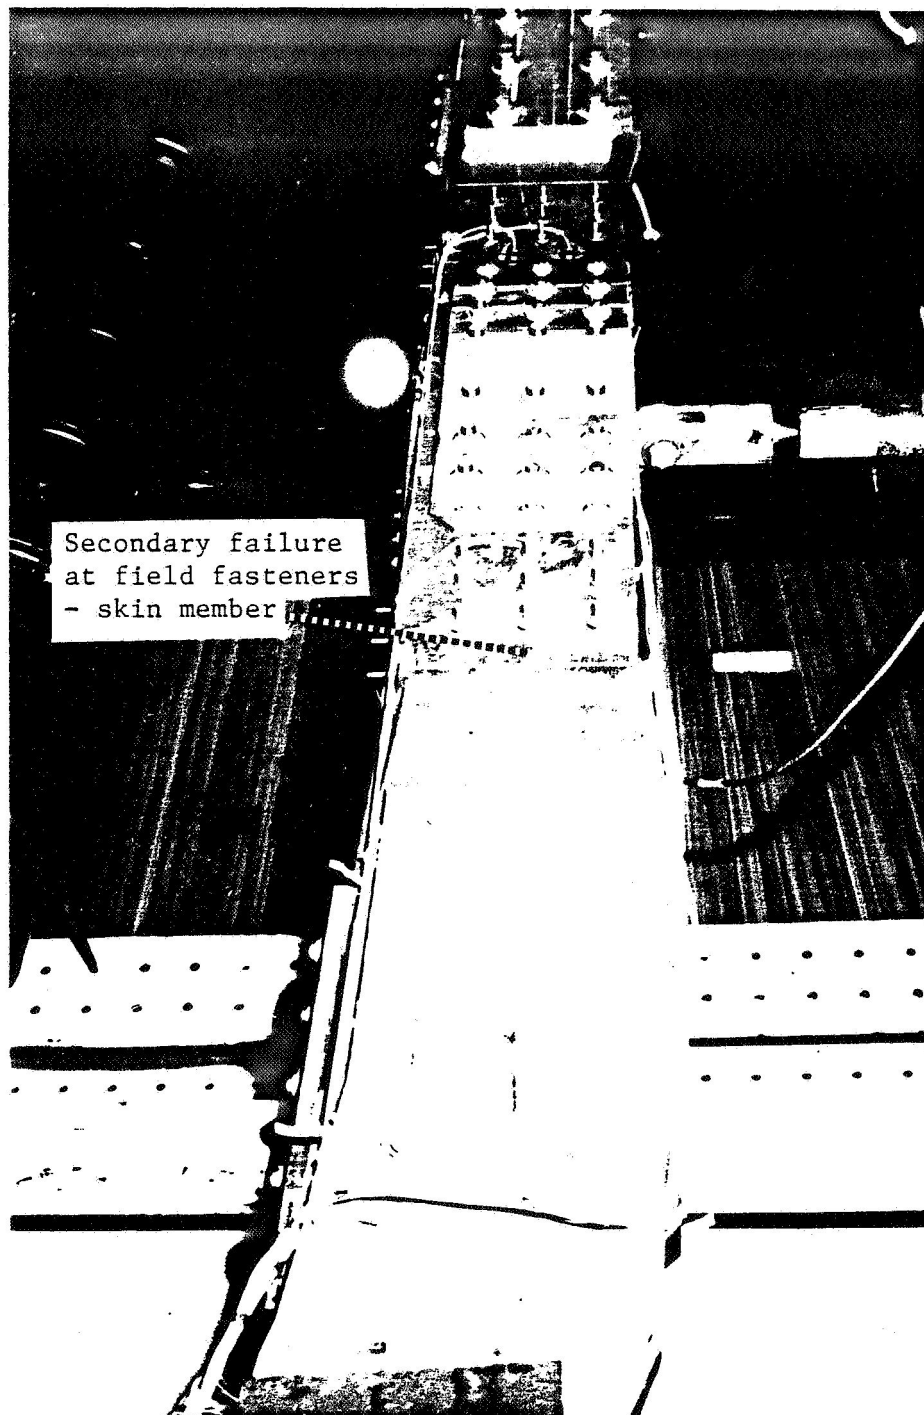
TECHNOLOGY DEMONSTRATION TEST #1 - END FITTING FAILURE
